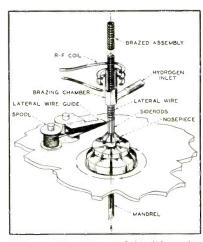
Apparatus used for fabrication of conventional pencil-tube grids
